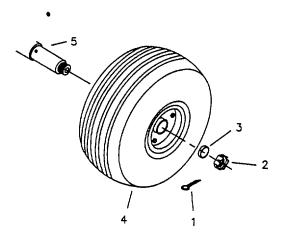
Wheel Assembly for Model 1730-EG-100
